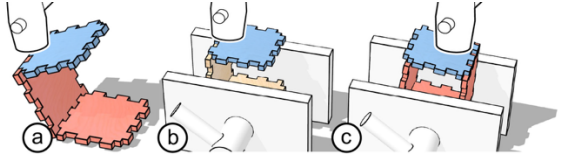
(a) An unstable assembly can be (b) fixated using a vise, (c) but when plate P needs to be inserted into *multiple* plates, acute angles in assembly A can prevent assembly.
